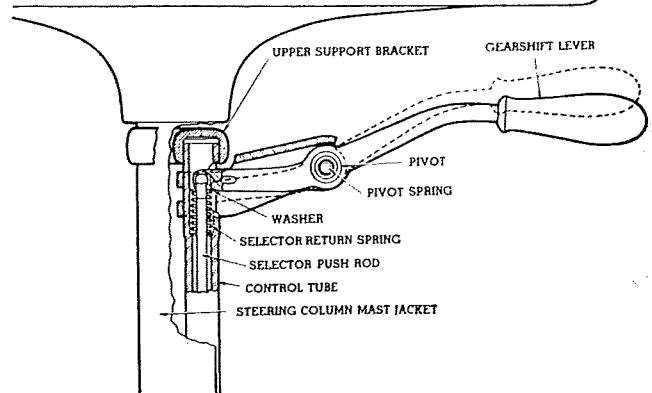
Chevrolet 1939. Gearshift Lever Cross Section
